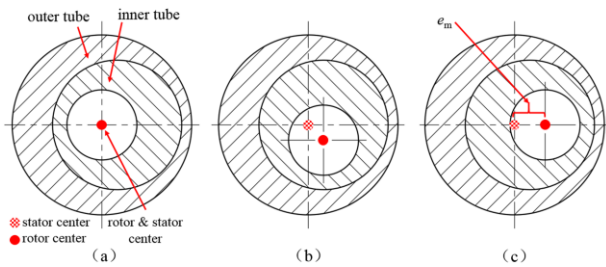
The cross-sectional sketch of the lower whirl bearing components (WBC).
